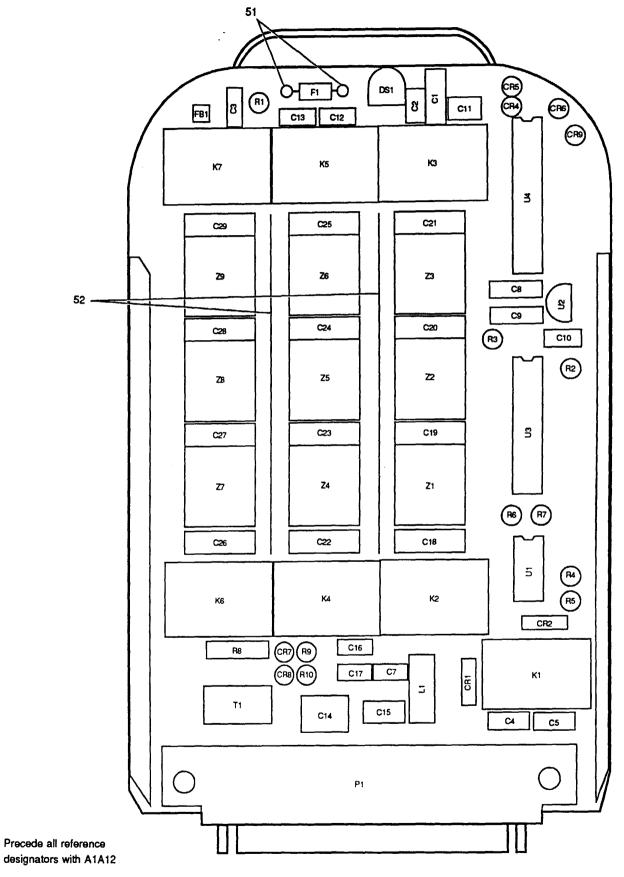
A12 Filter 5-7 Board Assembly (Sheet 1 of 2)
